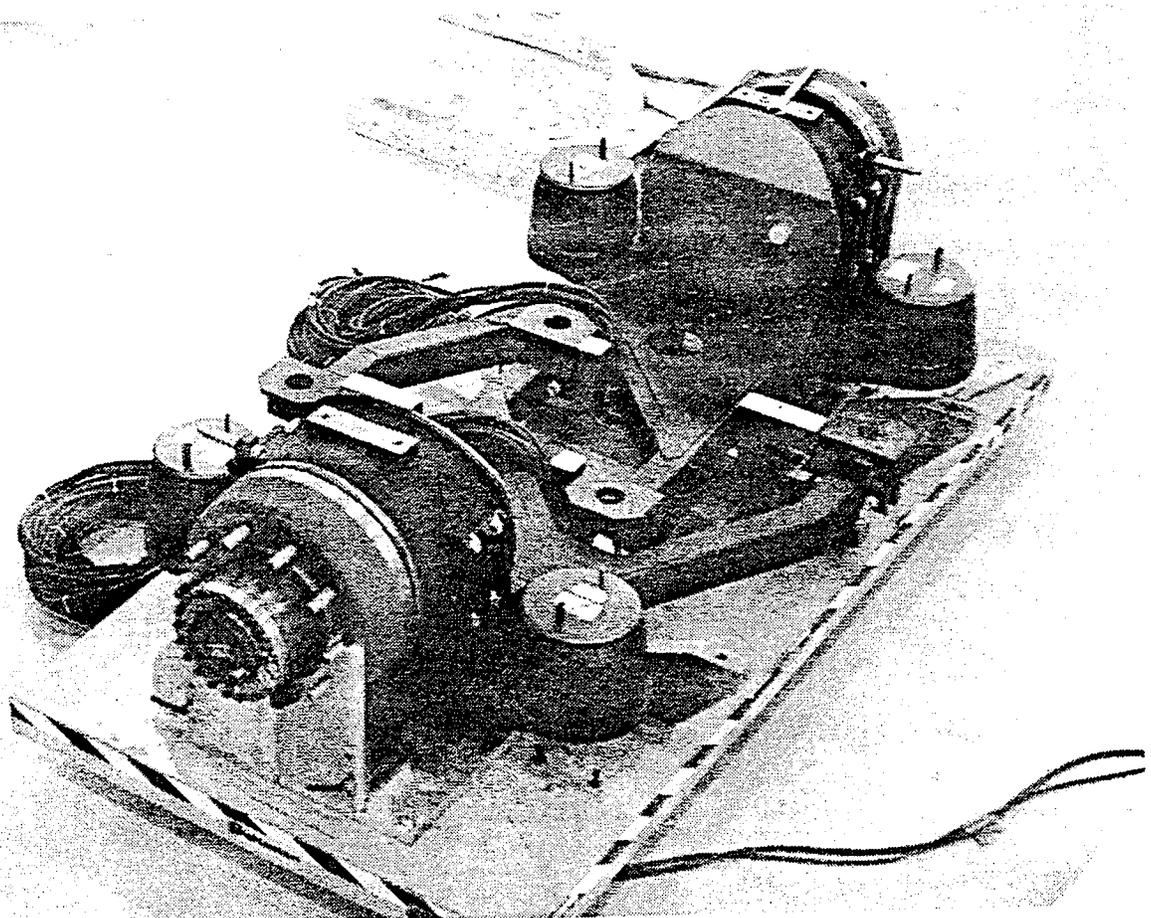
REAR SUSPENSION WITH WHEELMOTORS
